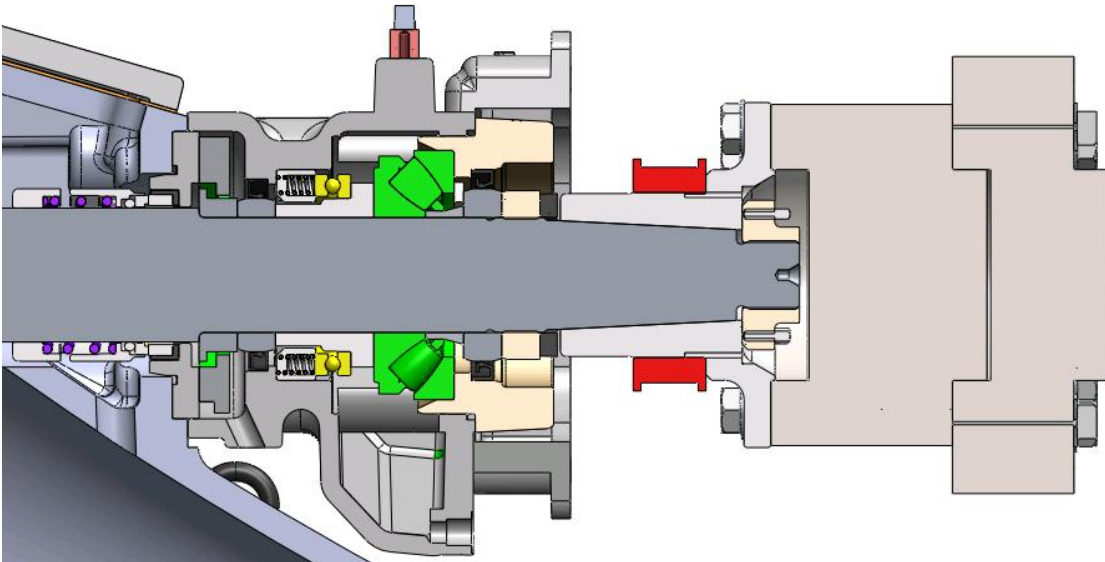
Partial Section View of the Alternative Thrust Bearing Assembly in the HJ364 Test Rig
